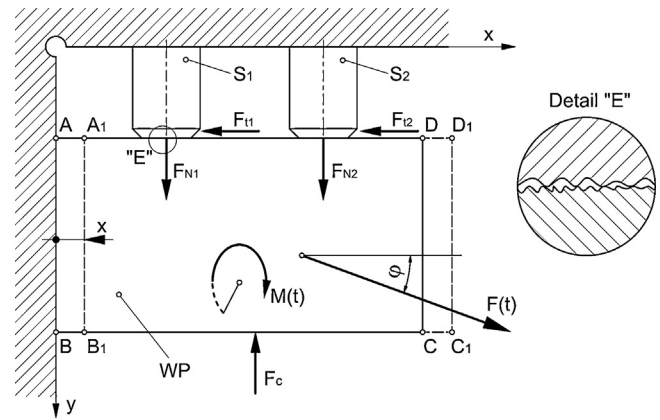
Schematic drawing of fixture elements–workpiece interface compliance.
